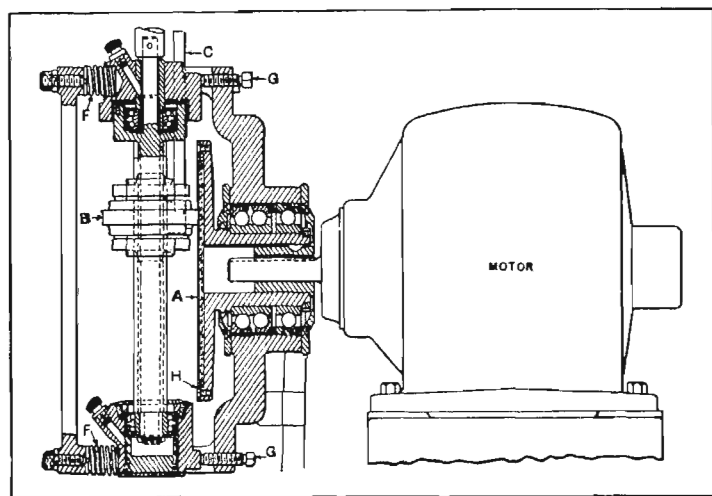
Speed-changing Mechanism of Friction Disk and Wheel Type
